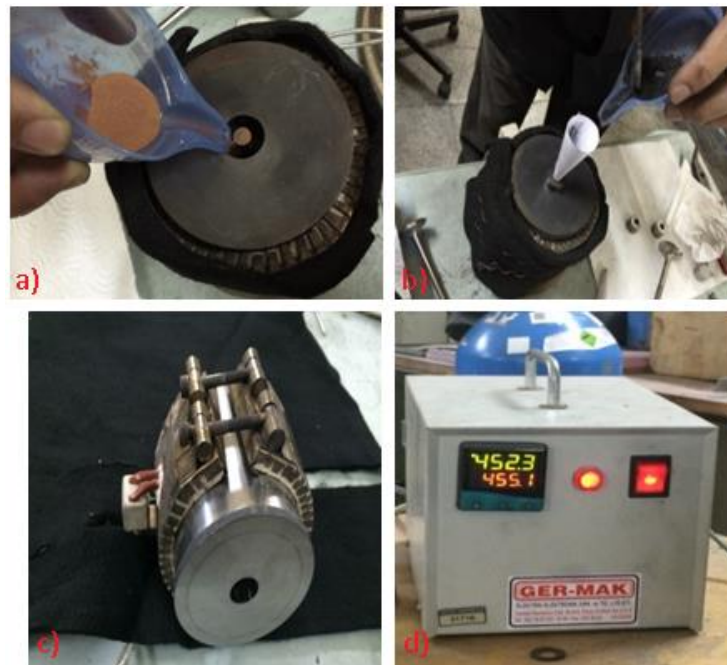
a) Copper powder filling into the mold, b)  $MgB_2$  powder filling into the mold cavity, c) Mold heating unit of the die production, d) The mold heating control unit.
